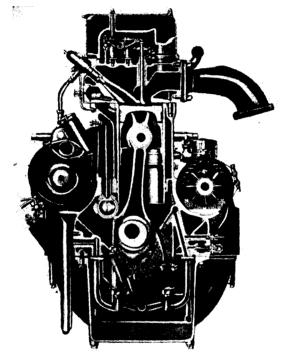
M.A.N. Air Chamber Diesel Engine.
